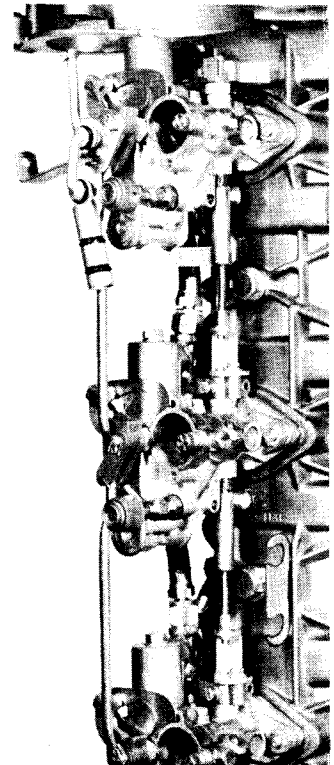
Carburetor Assemblies and Linkage Installed, Side View of Mark 75
